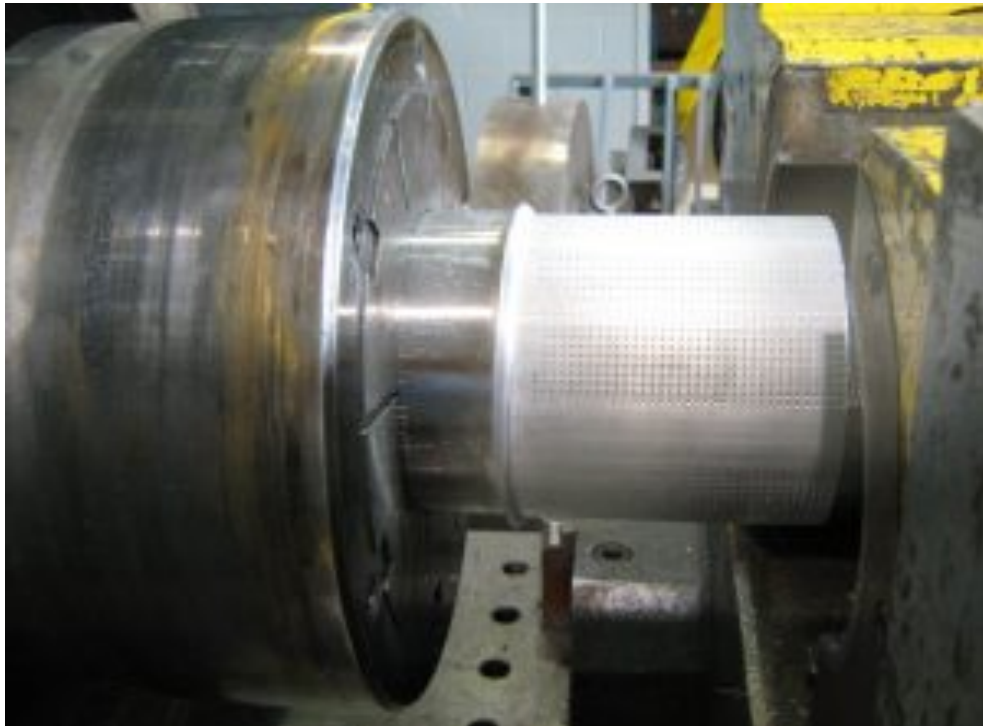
Friction Welding (Sato et al., 2015)
